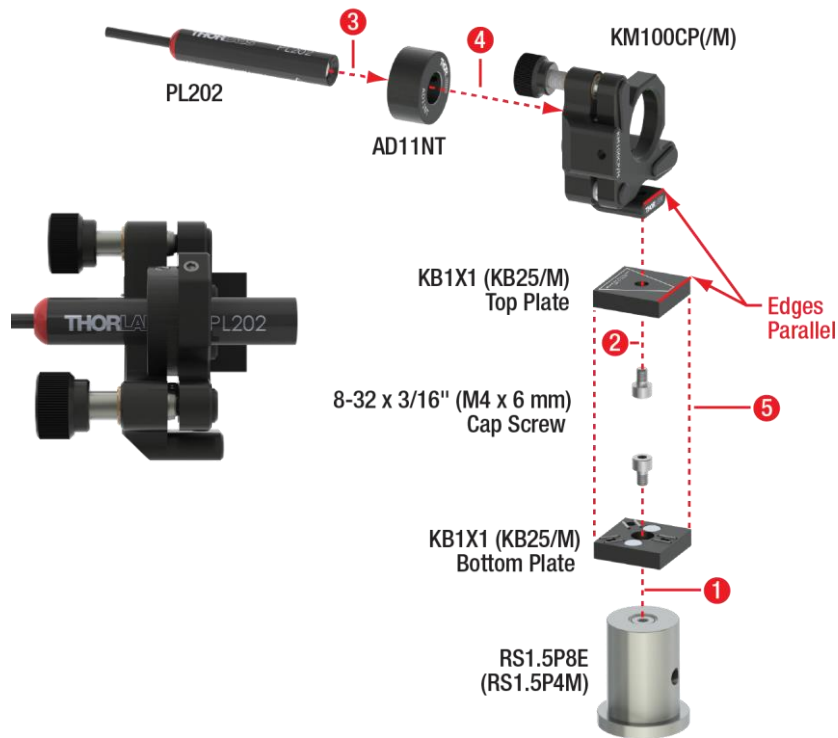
Assembly of Alignment Laser and Finished Component (Inset)
